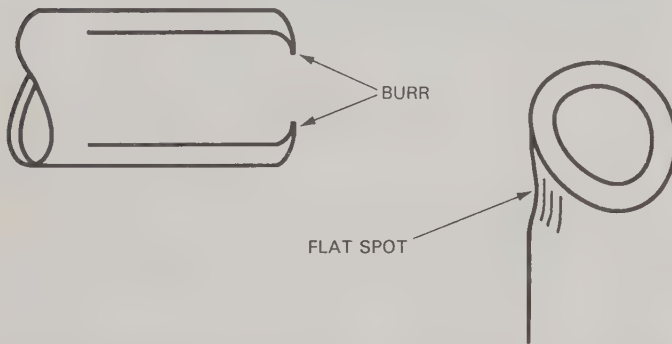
Excessive pressure from the tubing cutter blade will cause severe burrs and can result in flat spots on the tubing.
